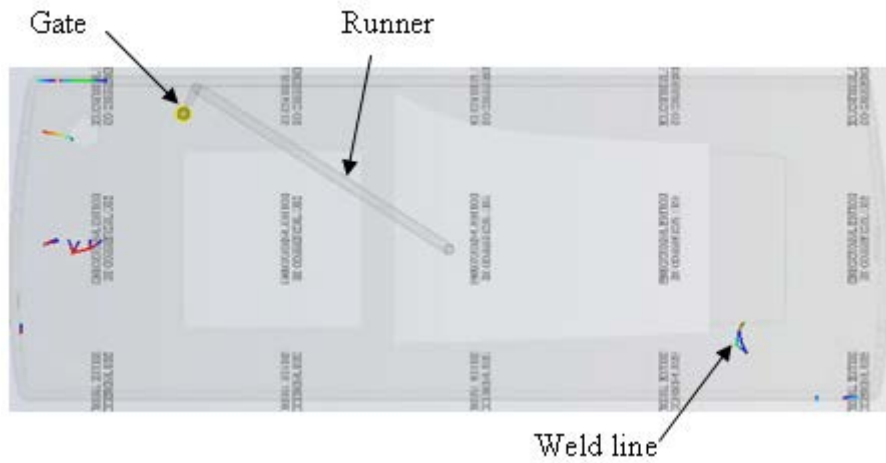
Weld lines produced at the injection pressure of 200 MPa
